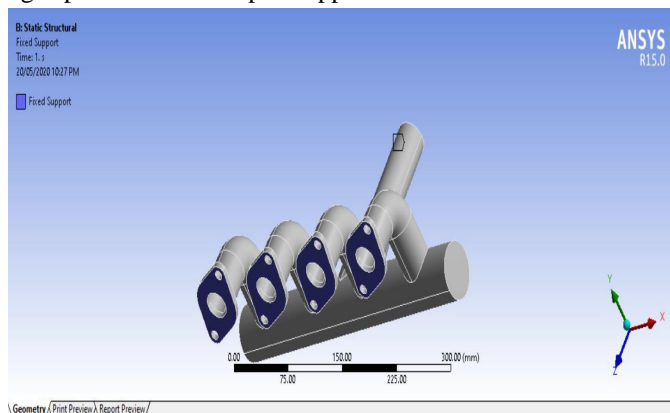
Exhaust manifold is fixed at the flanges and the another end
